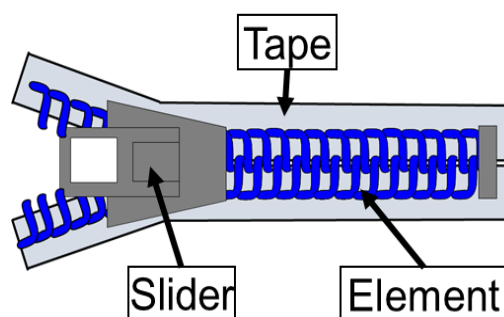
Configuration of a fastener showing the slider, tape, and element
